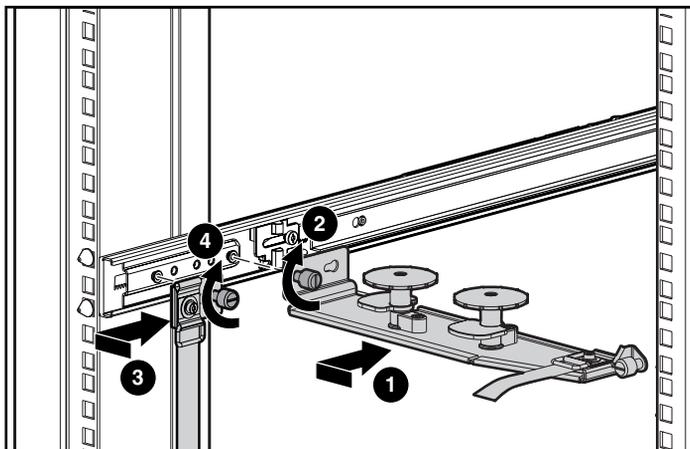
Inserting and attaching the fixed cable tray and Velcro cable strap (rear view)
